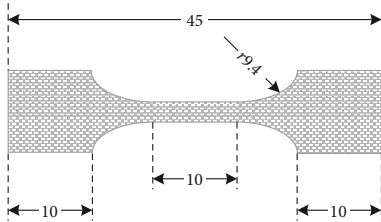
Geometry of the tensile specimen. Dimensions are in mm.
